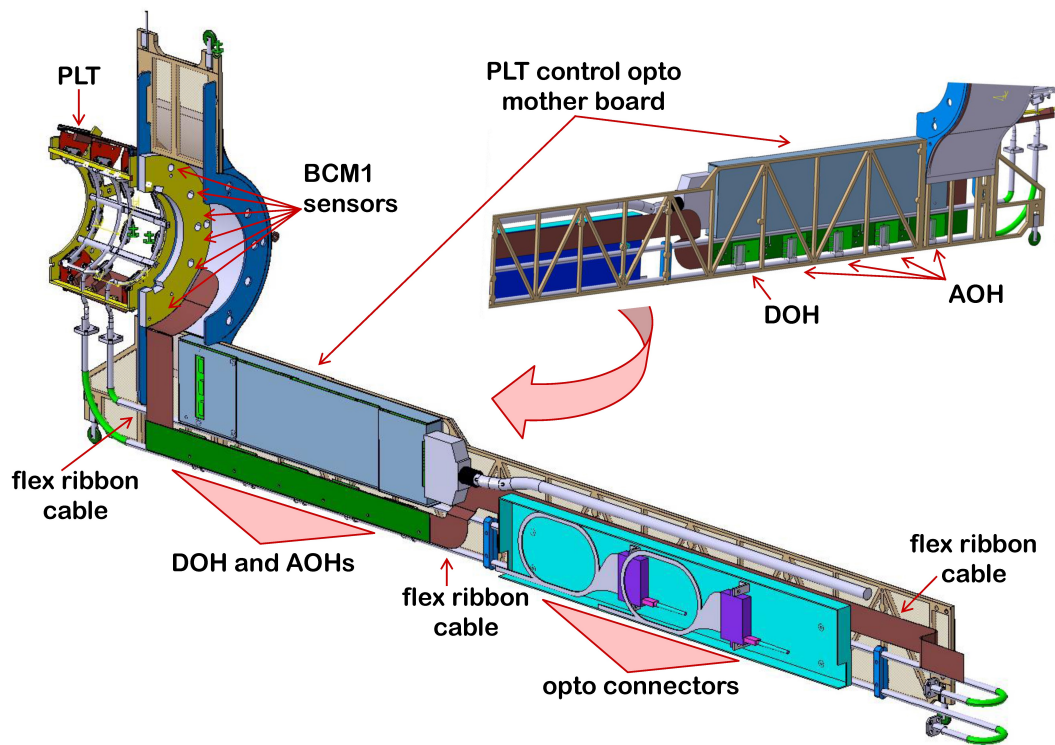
Detailed drawing of the PLT/BCM1F/BCML1 carbon fiber support carriage.
